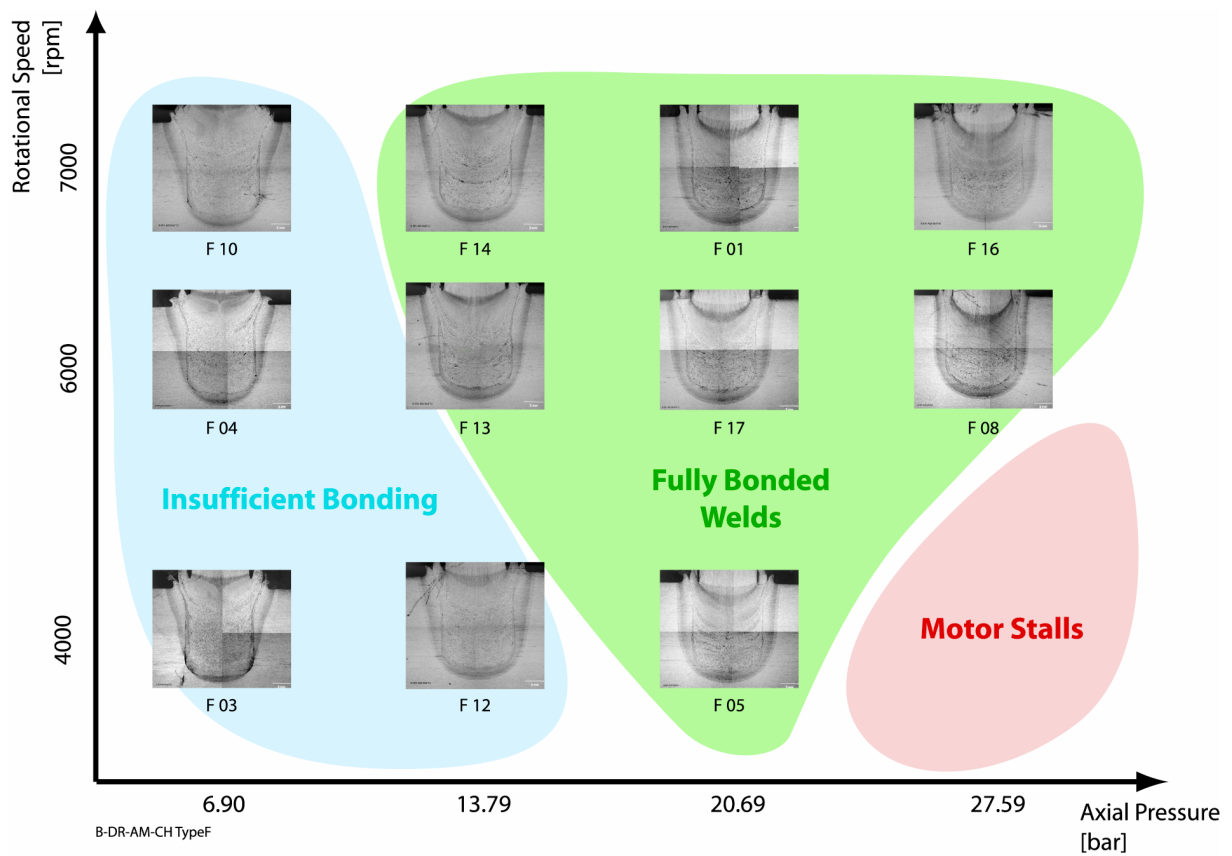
Welding parameter matrix for 10 mm diameter studs and 12 mm diameter holes in X65.
